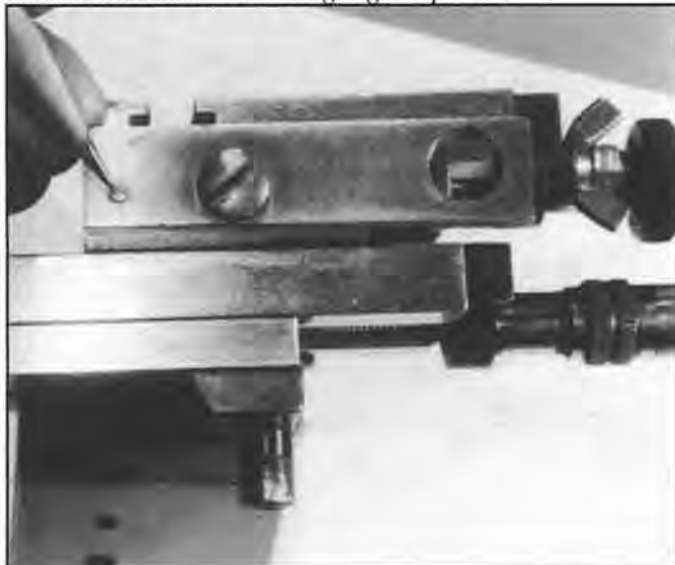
Dowel pin for longitude gauge bracket. A single #8 screw holds the bracket.
